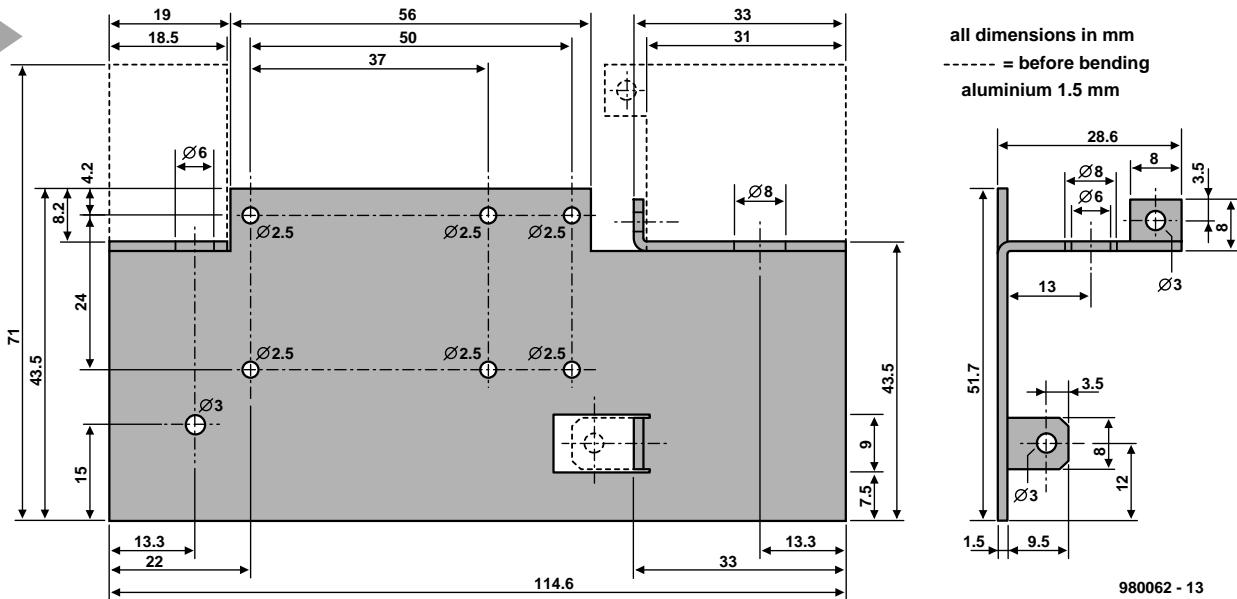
Drilling, cutting and bending details of the internal aluminium chassis.
